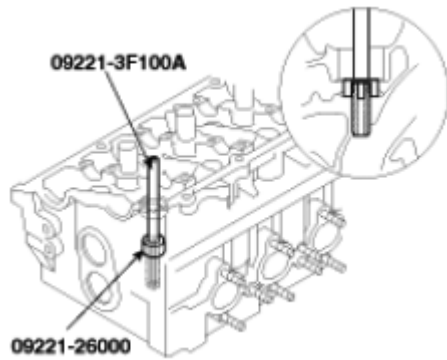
Pressing Valve Guide Using SST (09221-3F100A, 09221-26000)
